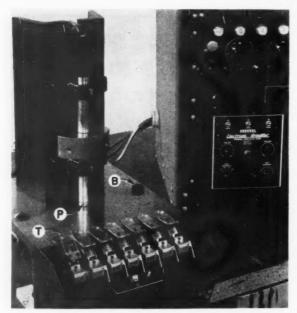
Semi-automatic gage designed for classifying paper-thin washers for thickness: P—gage plunger; B—operating button; T—Irap door to disposal chute.
